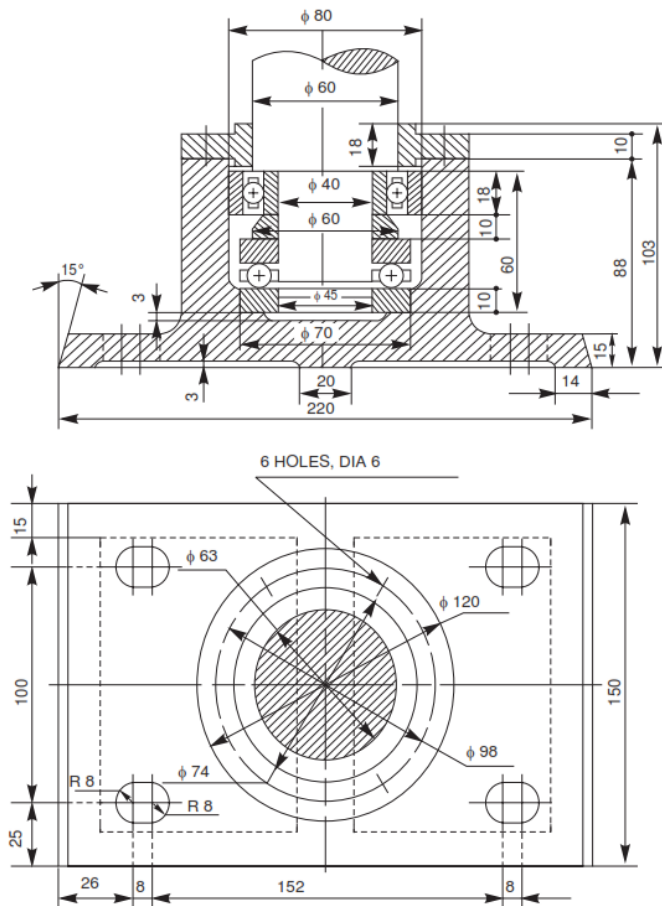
Foot-step bearing with radial and thrust ball bearings
